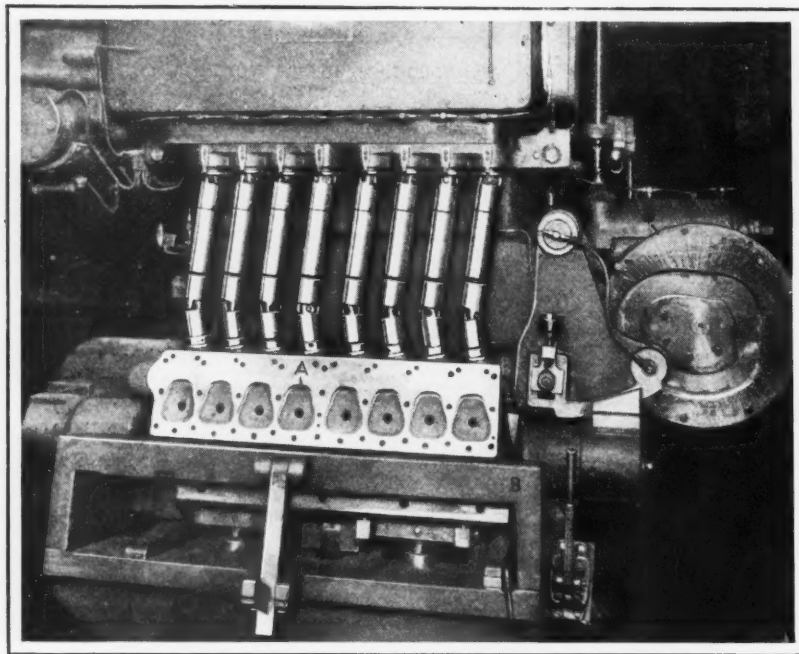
Eight-spindle Profiling Machine Used for Finishing the Combustion Chambers of Cylinder Heads for Packard Automobiles
